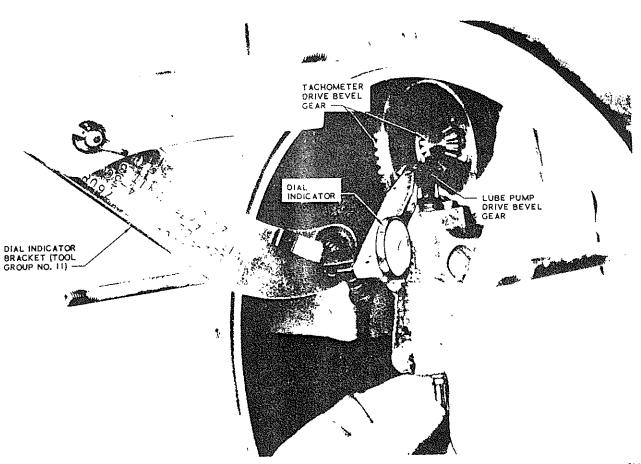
Checking Lube Pump Bevel Gear Backlash
